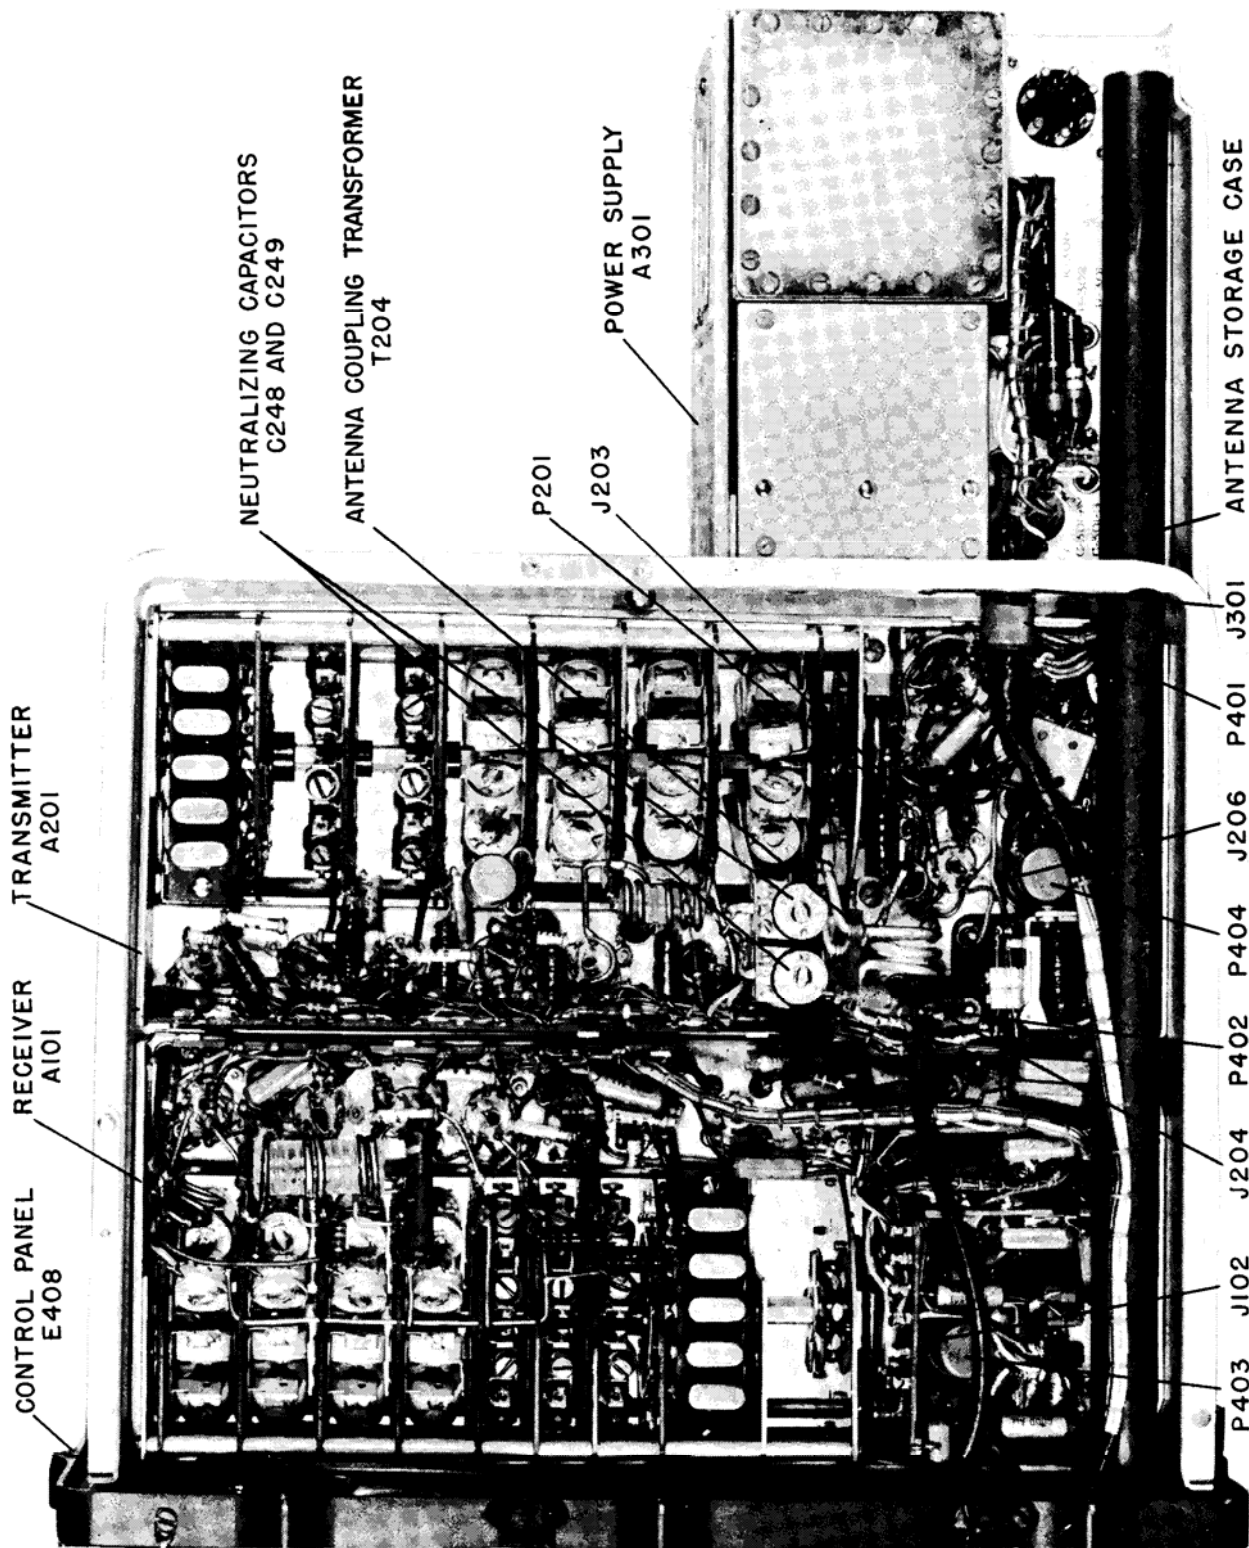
Bottom View of Radio Receiver-Transmitter CKB-43069-A Chassis
